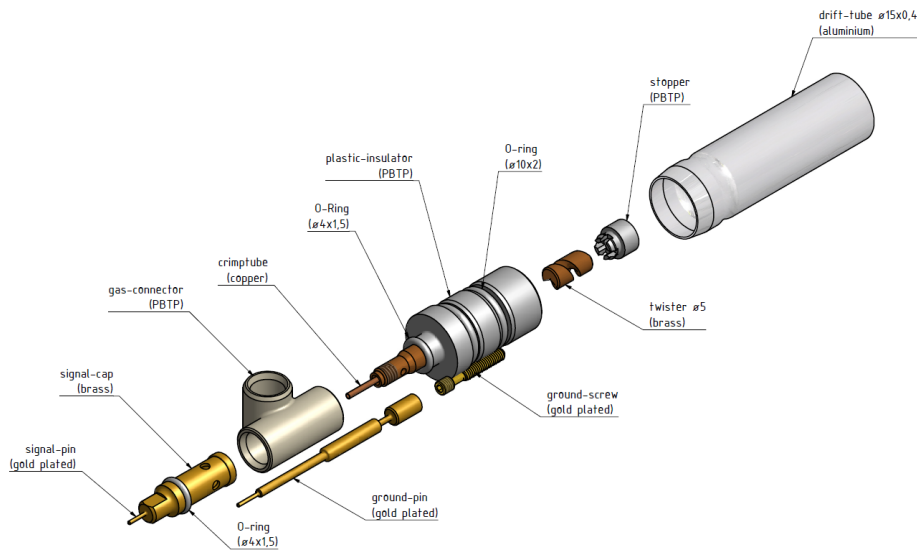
Exploded view of the tube endplug. Included in the lower left is the gas connection as well as signal readout as well as the grounding pin and screw for the tube.
